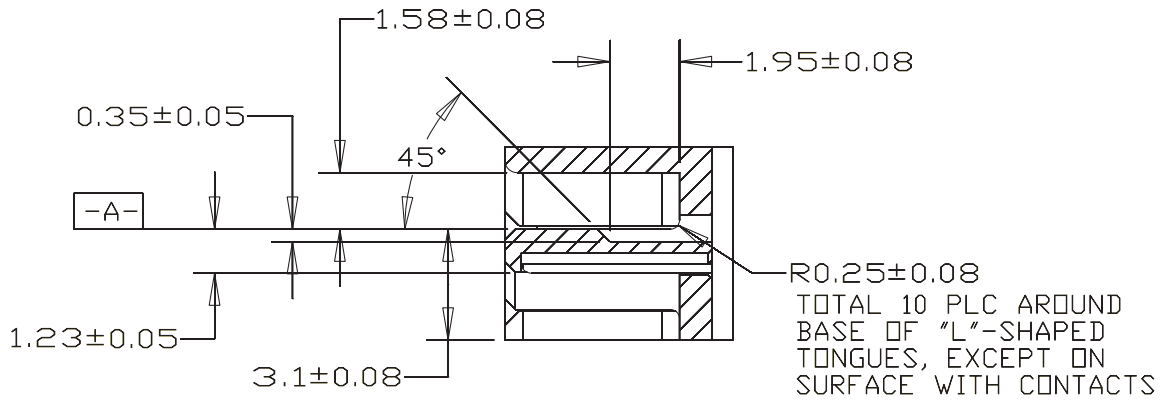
Slimline Device plug connector interface dimensions (Section A-A)
